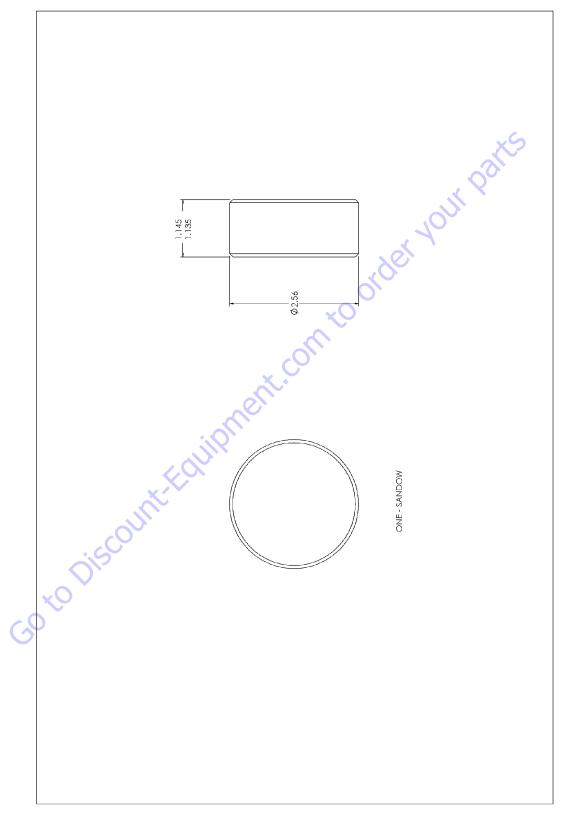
Assembly Tools - Spacer - Brake Disc Installation
